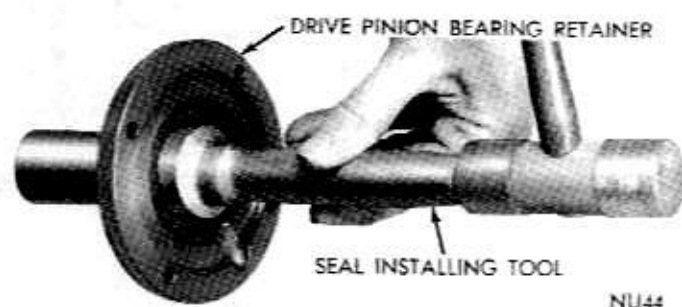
Installing Seal in Drive Pinion Bearing Retainer
